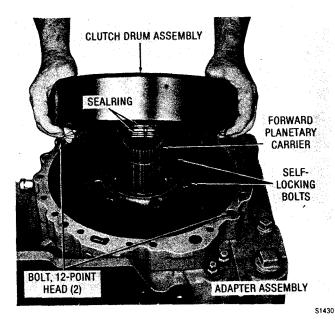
Removing high-range clutch drum assembly (TRT 2221-3, 2421-3 with underdrive)
